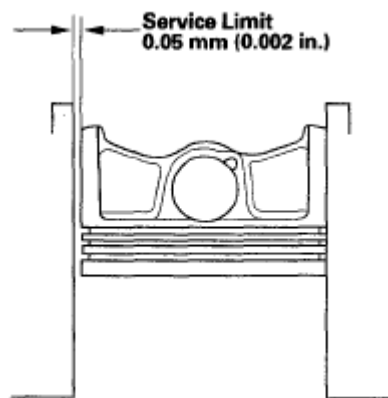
Identifying Cylinder Bore And Piston Diameter Clearance
